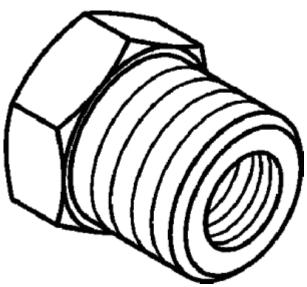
Adapter 8406 Courtesy of CHRYSLER LLC
